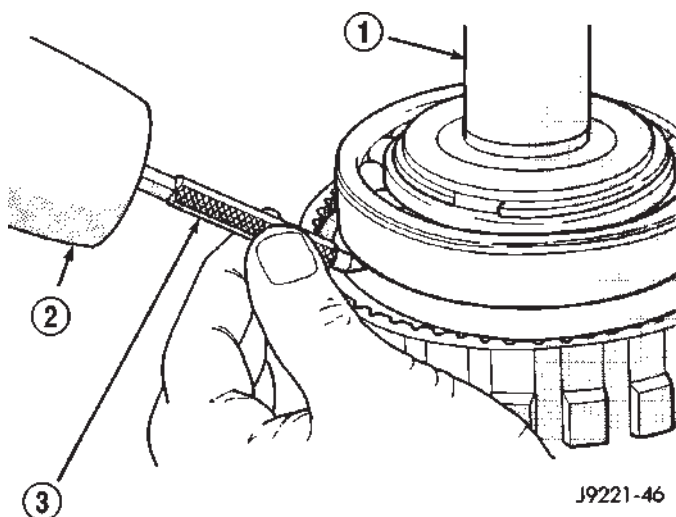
Clutch Drum Inner Retaining Ring Removal
